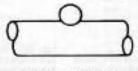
Shift rod grooves must have straight 60 degree sides and allow clearance under detent balls.
